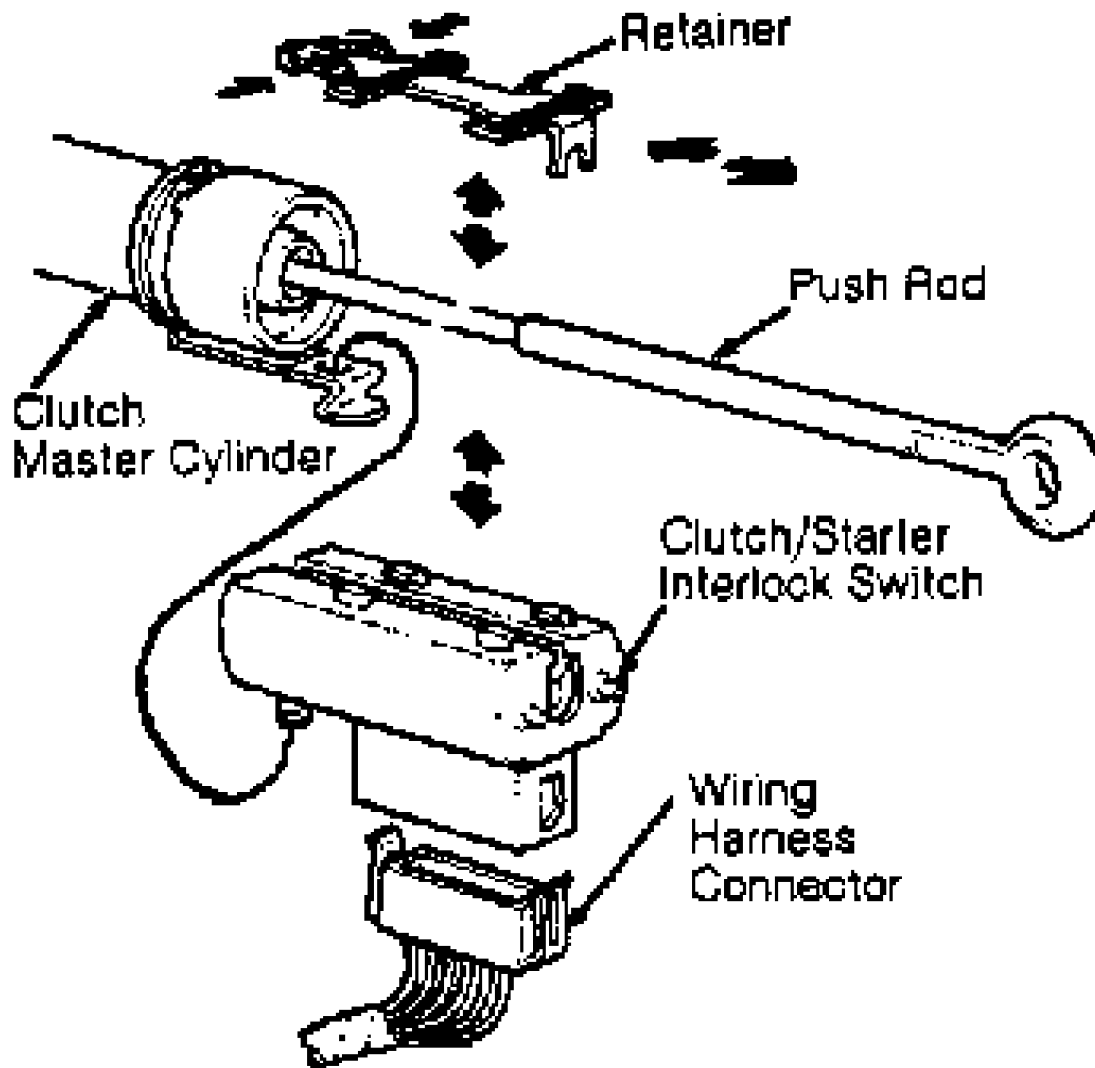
Testing Clutch/Starter Interlock Switch (Navajo)
